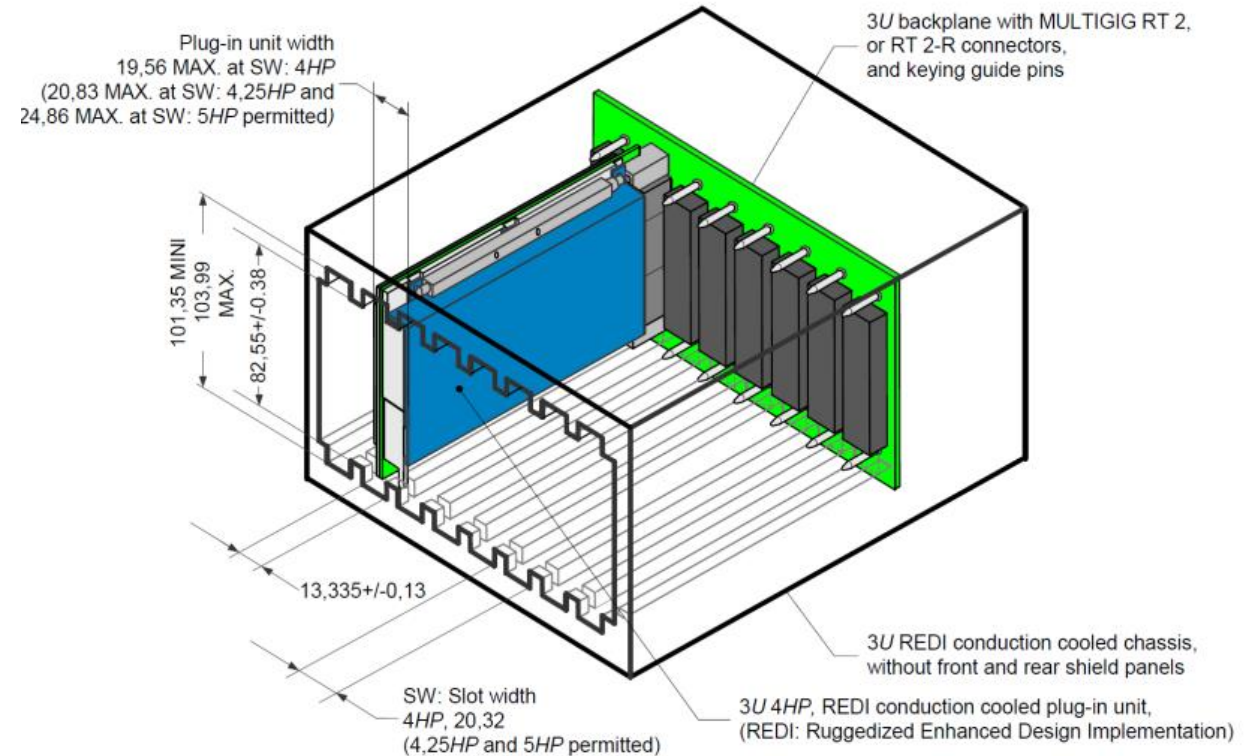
Assembly of VPX-REDI 3U conduction cooled chassis
